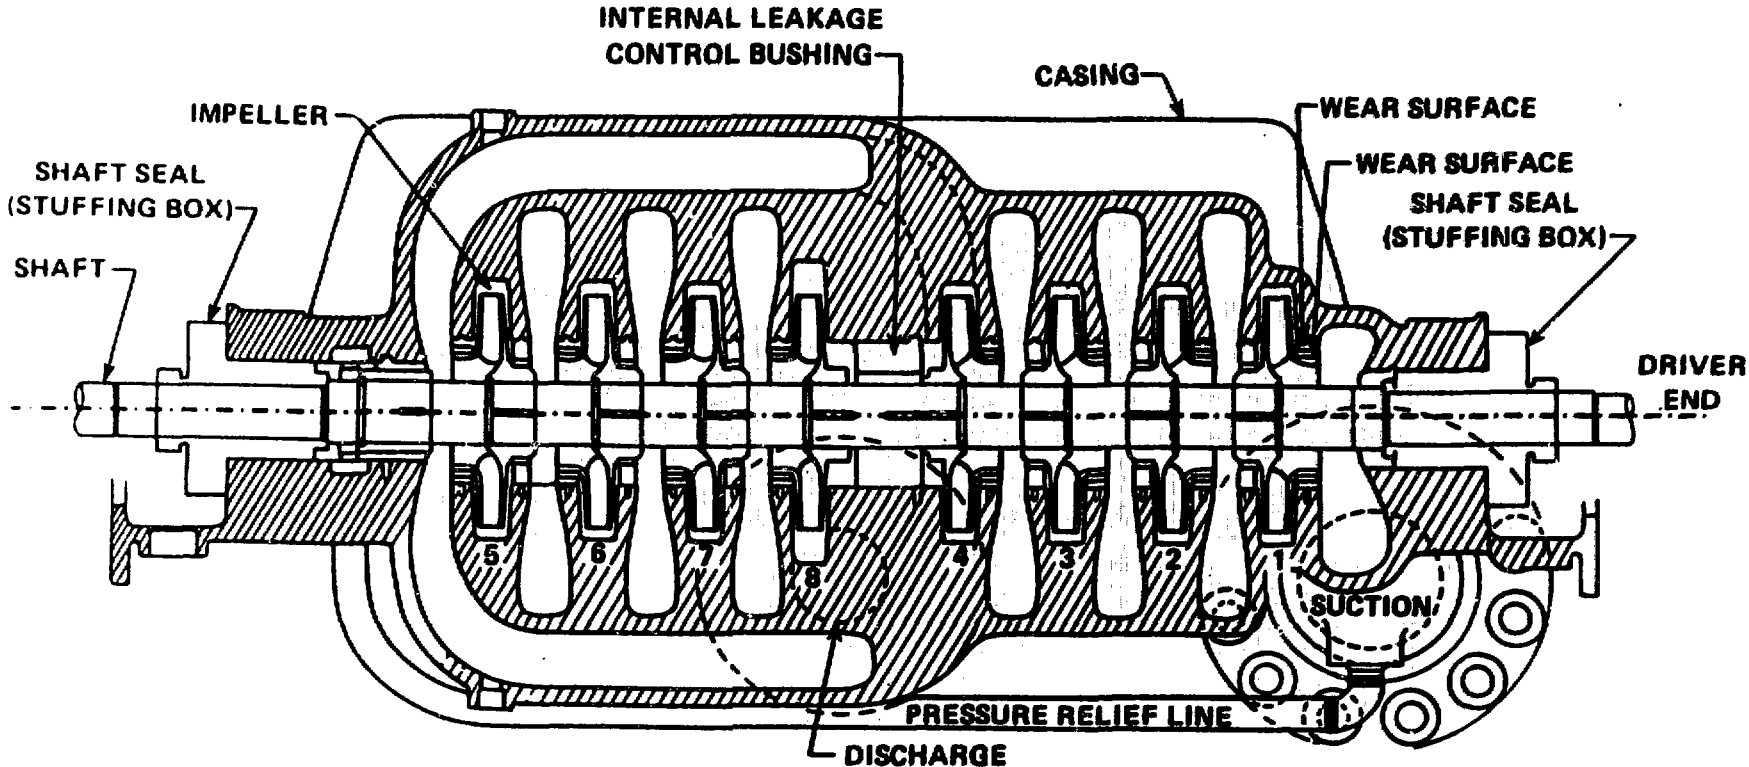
Single-suction, opposed-impeller auxiliary feedwater pump.
